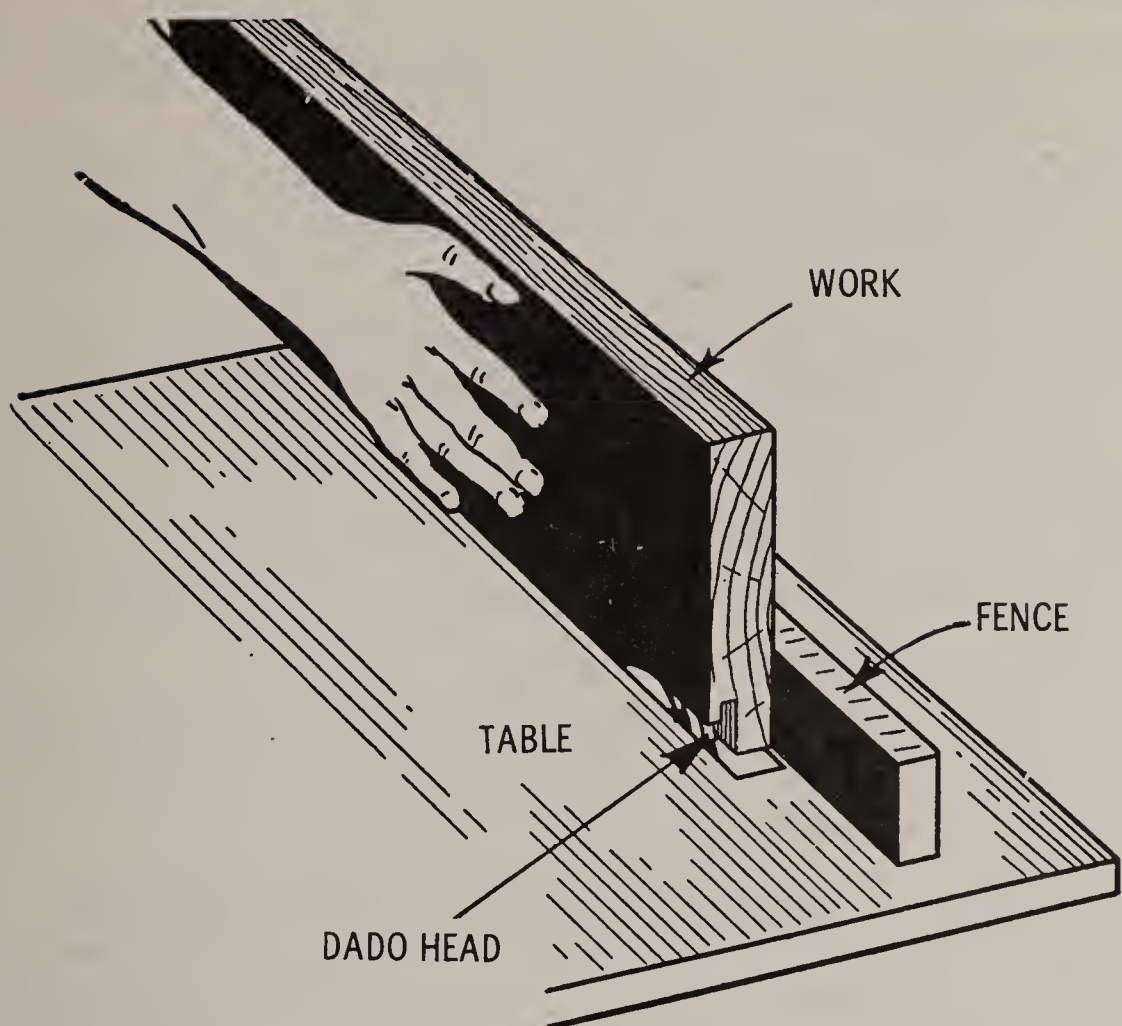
Method of cutting a rabbeted joint with a dado head. Joints of this type are used extensively in drawer construction.
